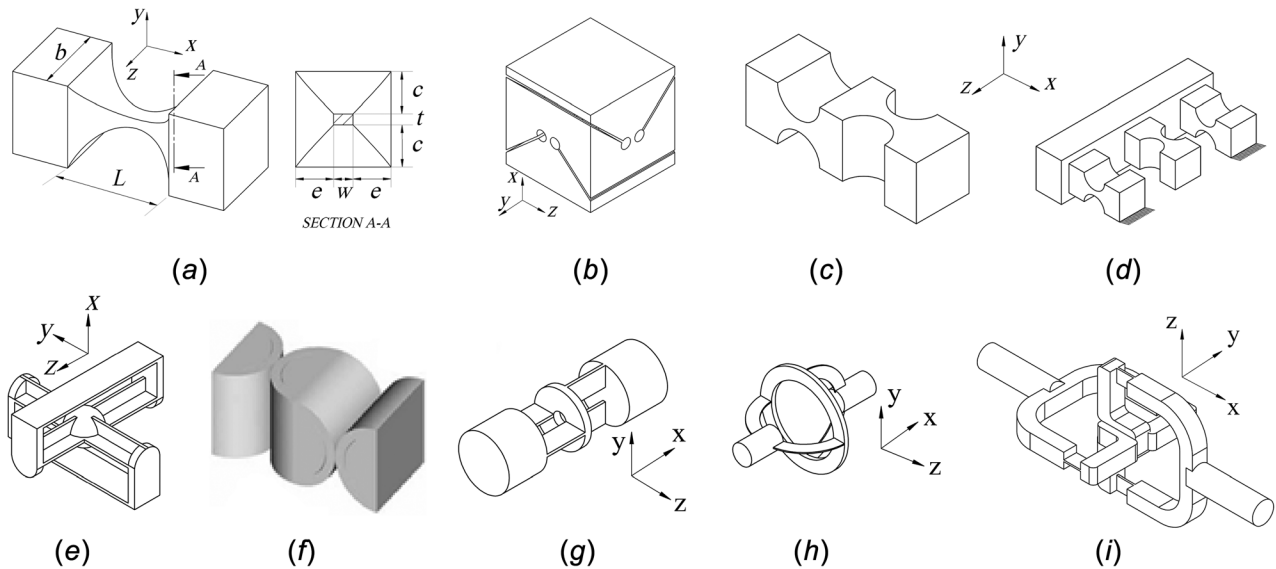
Compliant universal joints; (a) two-axis flexure joint, (b) notch U joint-1, (c) notch U joint-2, (d) collinear notch joint, (e) CU joint, (f) XU-joint, (g) Stark-1, (h) Stark-2, and (i) compliant cardan U joint
